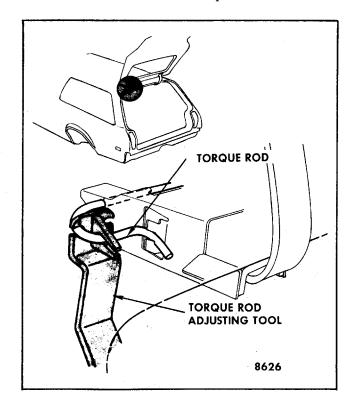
Torque Rod Adjustment - H-15 Styles
